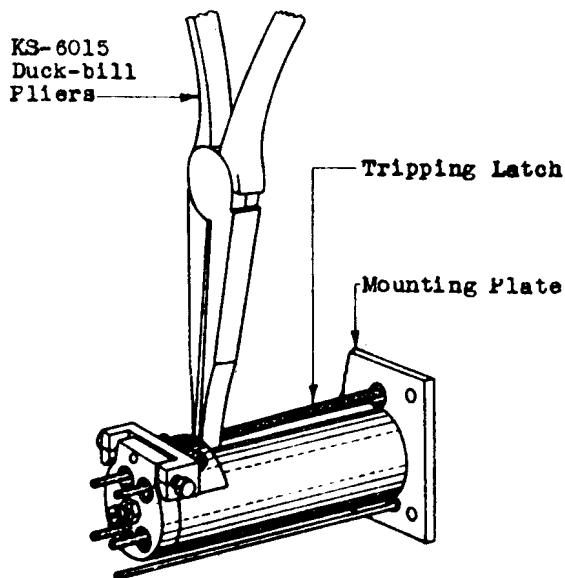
Method of Adjusting for the Tripping Latch Position on 19, 35 and 56 Type Drops
